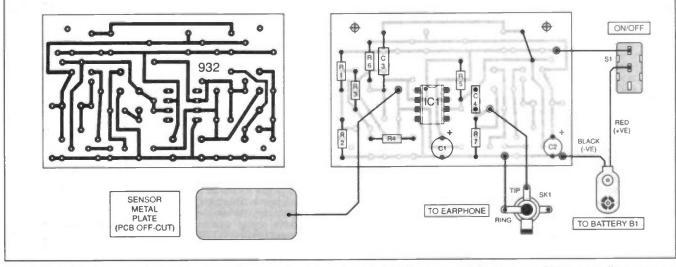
Multi-project printed circuit board component layout, underside full size copper foil master and wiring to off-board components. Not all holes/copper pads are used, so you must double-check component positioning before soldering in place.
